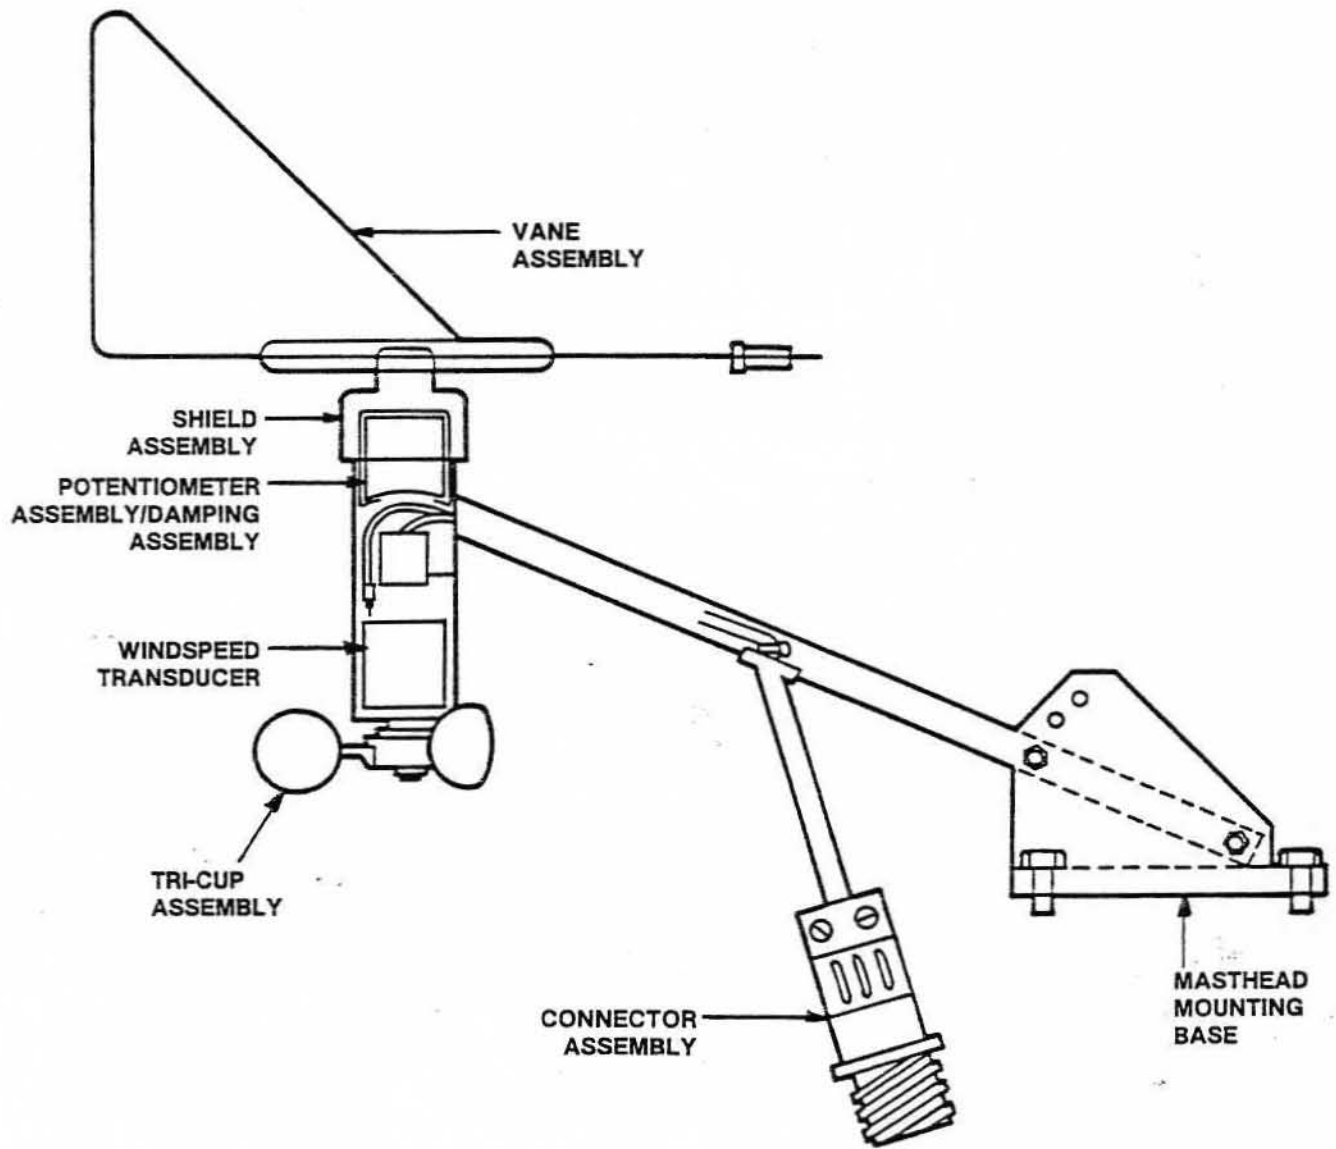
Masthead sensor assembly replaceable parts (see 5.1 Parts List).
